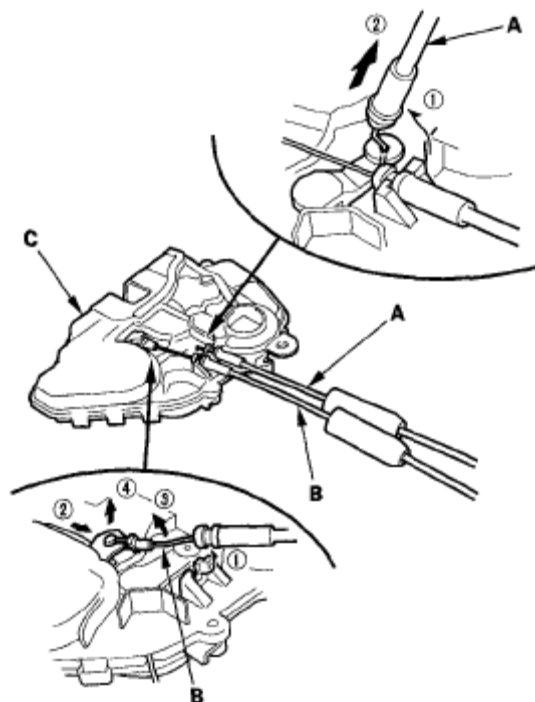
Detaching Latch And Inner Handle Cable From Latch
